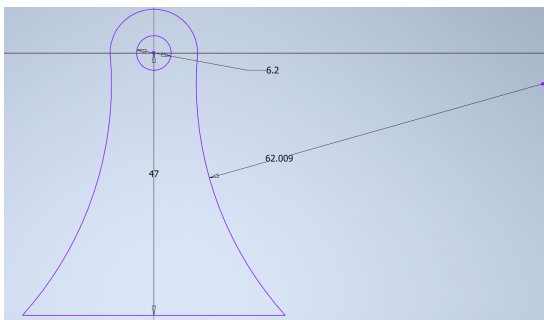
Camshaft Supports, Pivot Shaft Supports and Tail Shaft Supports (Parts 7, 8, 9 - The hole diameter is the same for all three parts, however for the tail the height is 30 mm, for the pivot the height is 47 mm and for the camshaft the height is 40 mm. The part is scaled accordingly)
